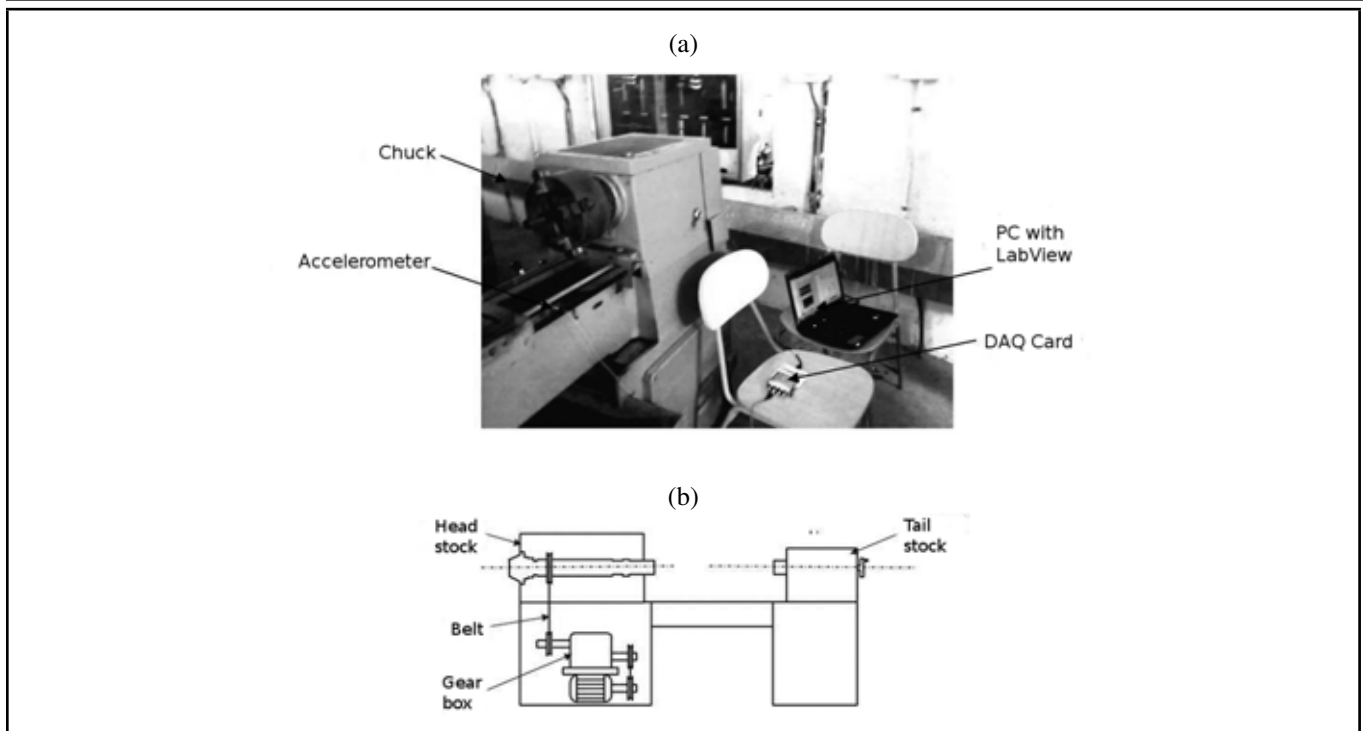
a) Experimental setup (Machine tool with data acquisition system); b) Schematic layout of drive system of the machine tool.
